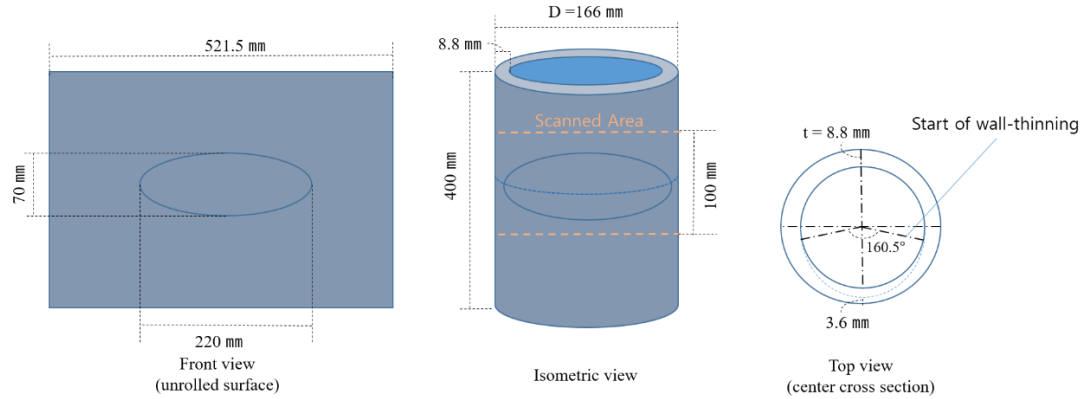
Steel cylinder with oval-shaped wall thinning on the inside
